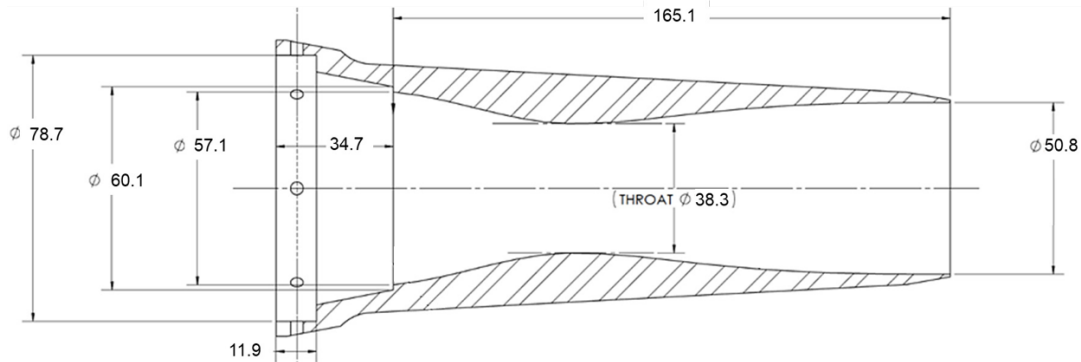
Cross-section of Mach 2.00 axisymmetric nozzle (dimensions in mm)
